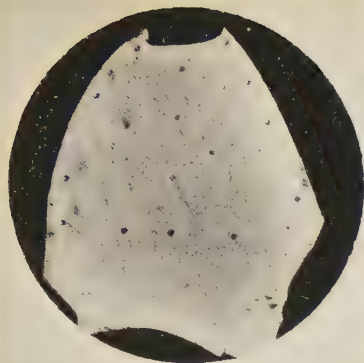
Tooth of worn Gear B tested for Hardness $\times 10$. (Reduced to $\frac{2}{3}$.)
